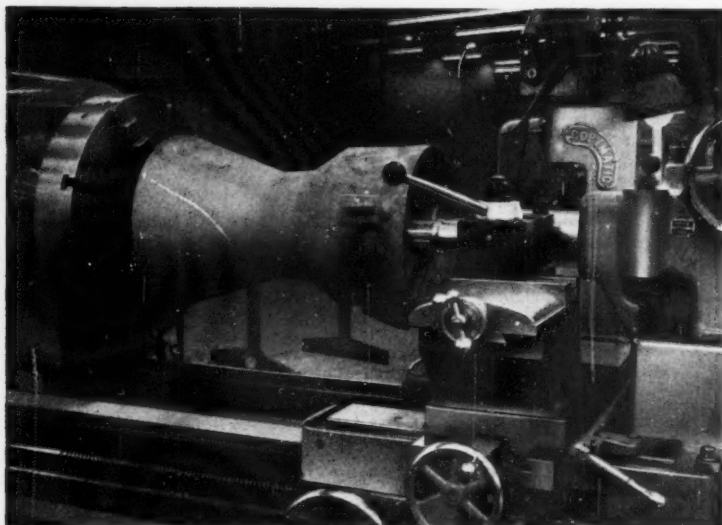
Machining the large-diameter bore of a case assembly on another engine lathe, with the overhanging end supported by an expanding arbor on the tailstock spindle
